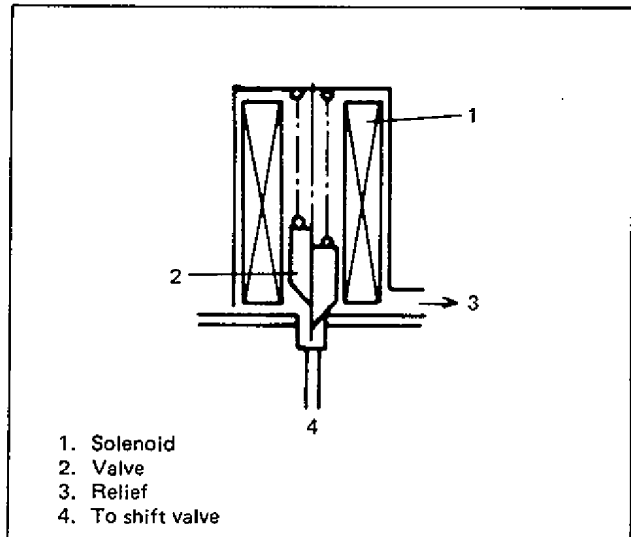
B-32 Direct Clutch and 2nd Brake Solenoids
